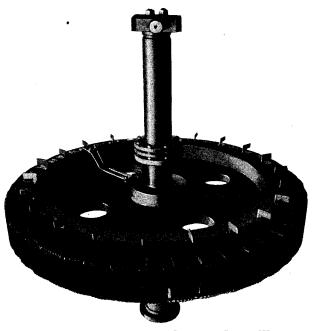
View of Rotor and Shaft of Small Water Wheel Generator.
